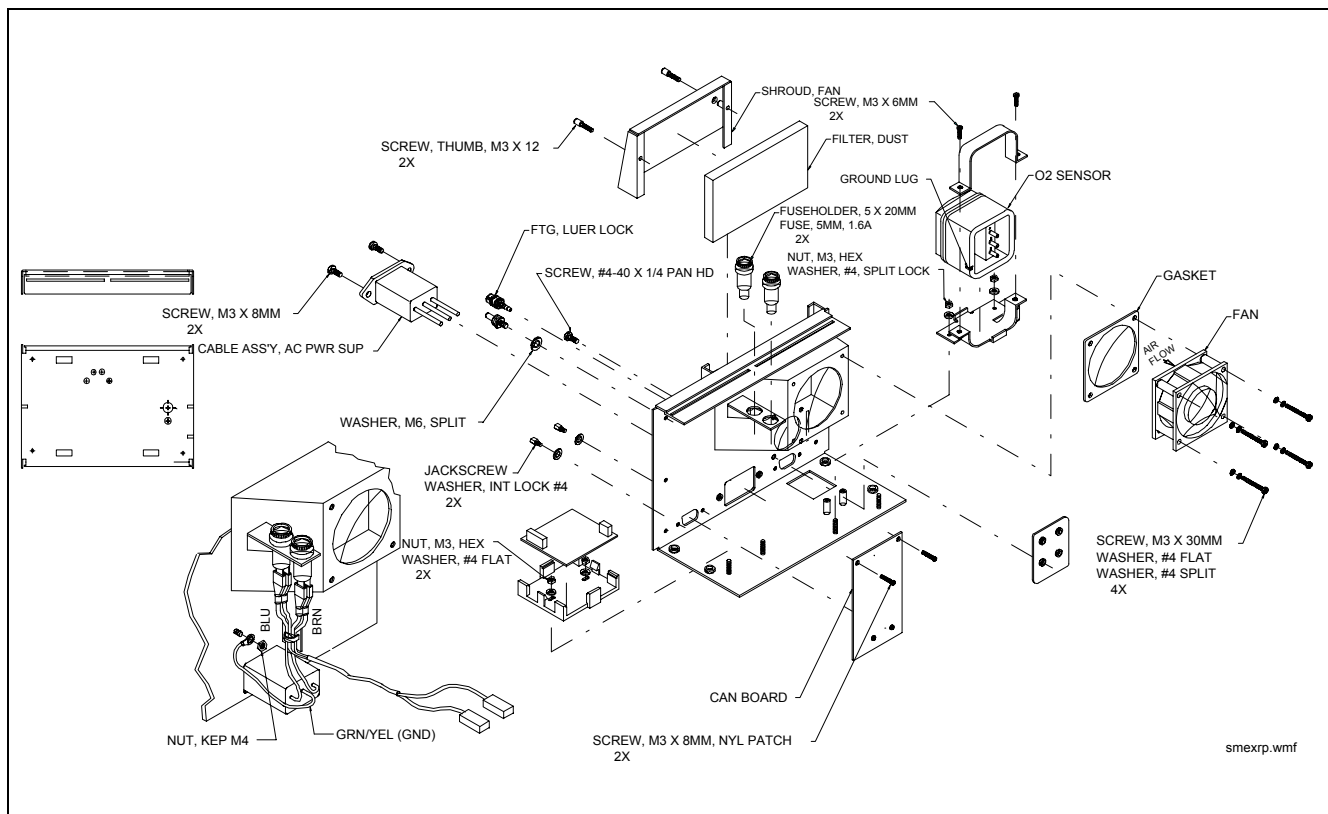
MULTI GAS+ Module Rear Panel Subassembly
